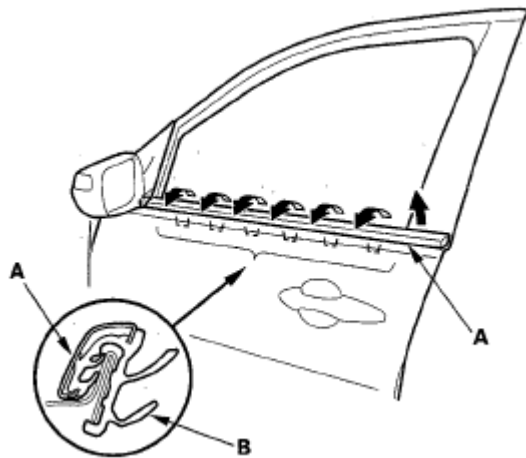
Identifying Door Glass Outer Weatherstrip And Inner Molding
